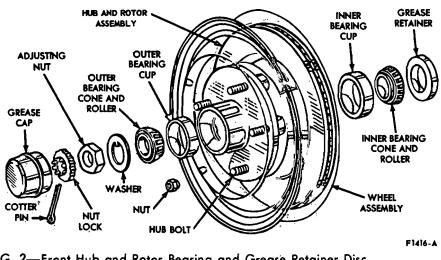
Front Hub and Rotor Bearing and Grease Retainer Disc Brakes—Typical
